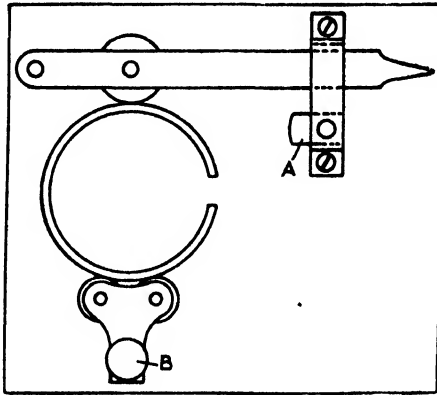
THE BRICO PISTON-RING TESTING APPARATUS
